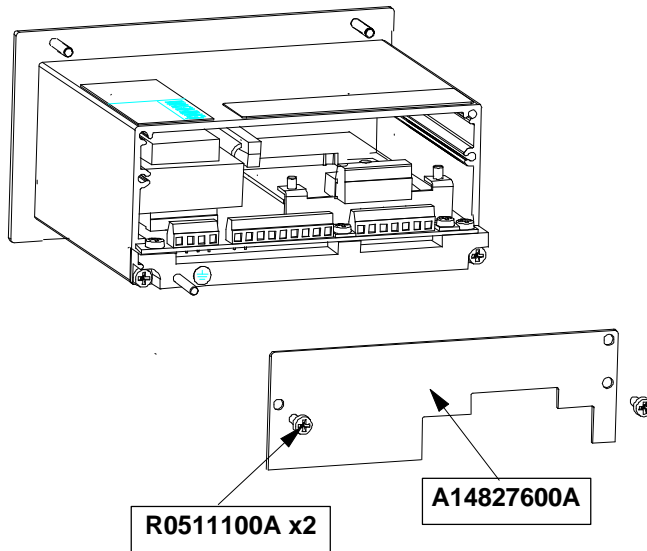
Allen-Bradley PCB Installation in Panel Mount Enclosure
